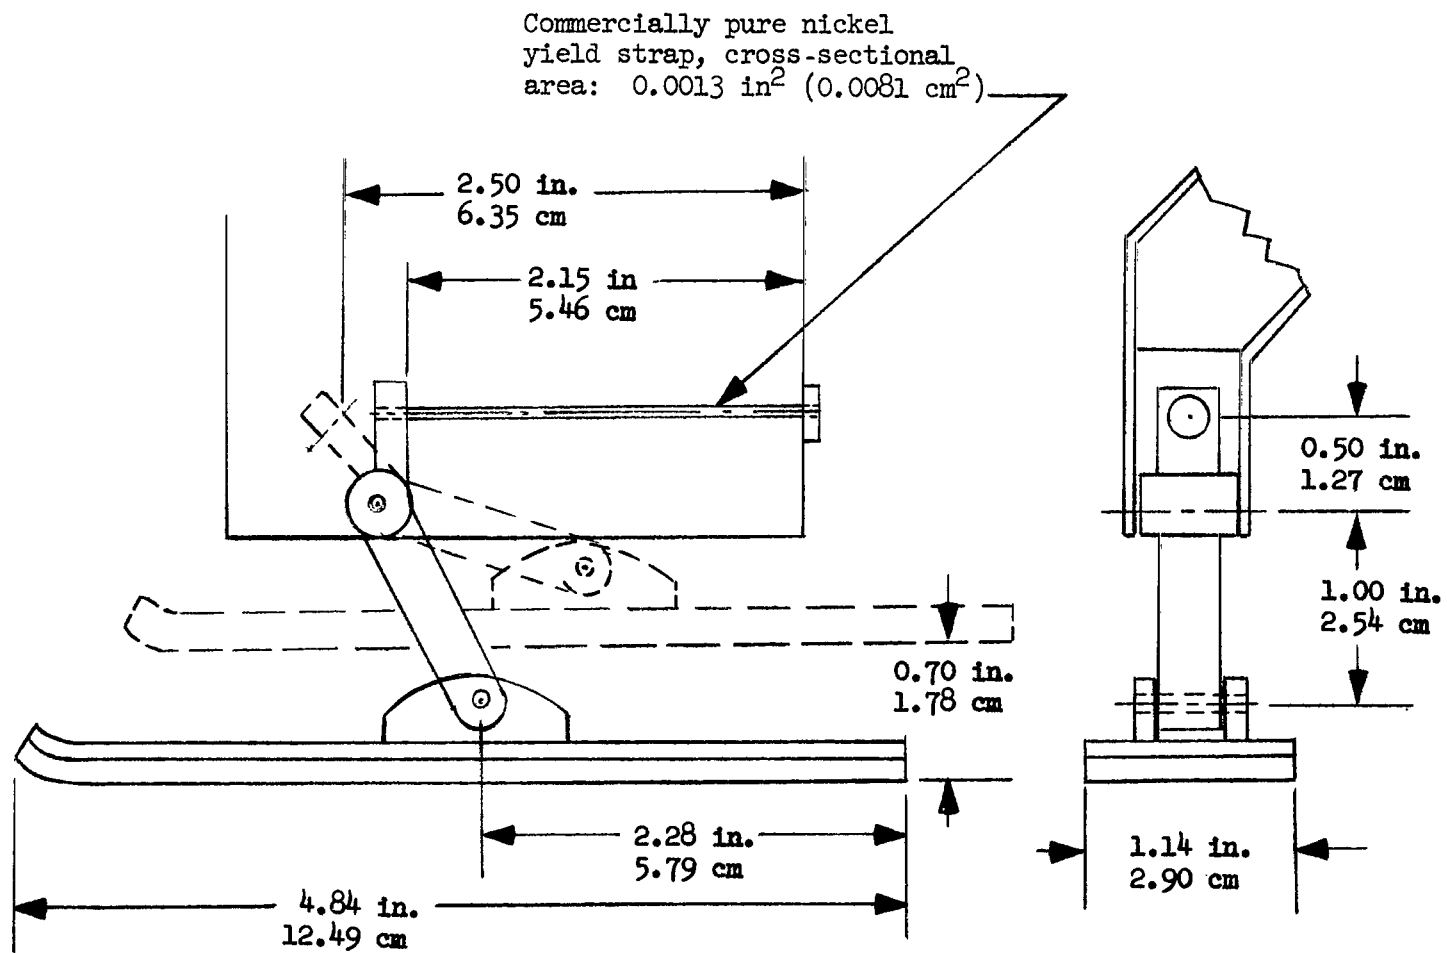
Typical mechanism for two-rear-skid installation. Dimensions are model size.
